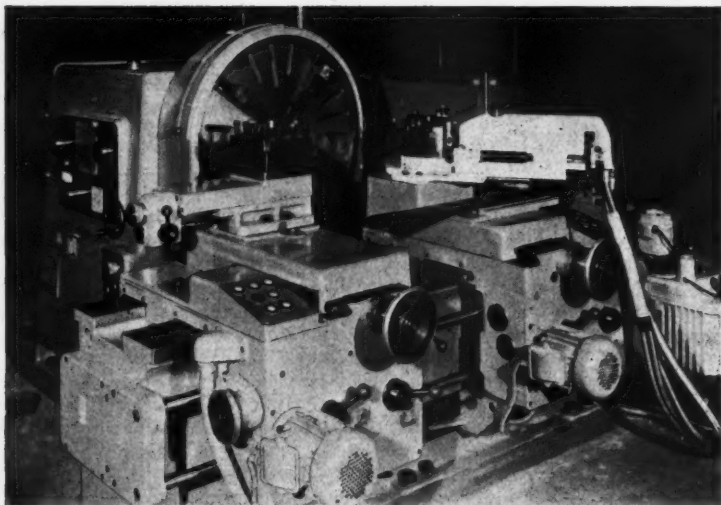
This Zerst facing lathe is the second smallest of a range of four sizes. It is seen with a hydraulically-operated copying slide mounted on the tool slide at the right
